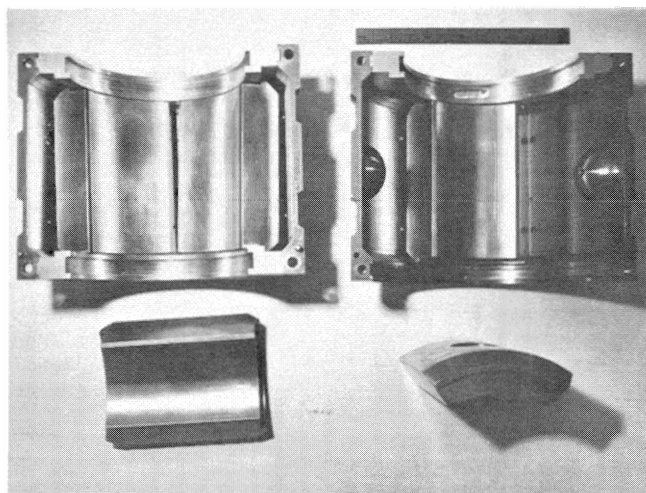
Tilting Shoe Radial Bearings with Six Mil Clearance before Installation on Pinion Shaft.
